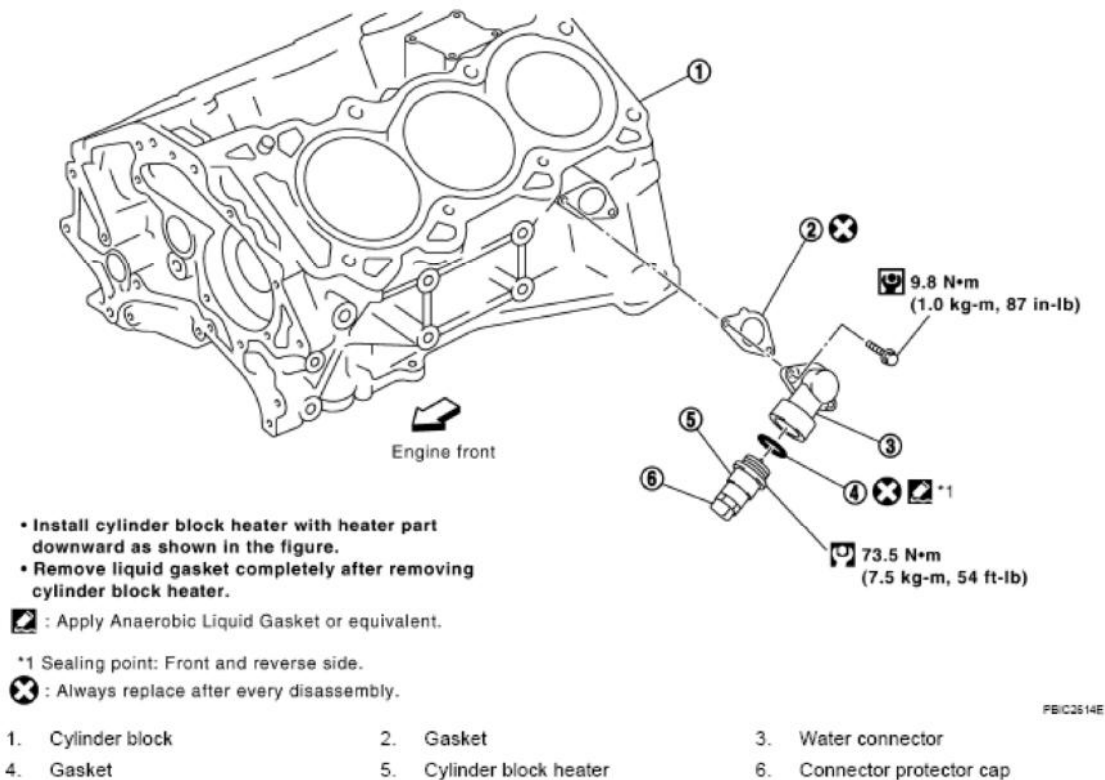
Identifying Cylinder Block Components With Torque Specifications (2 Of 2)
